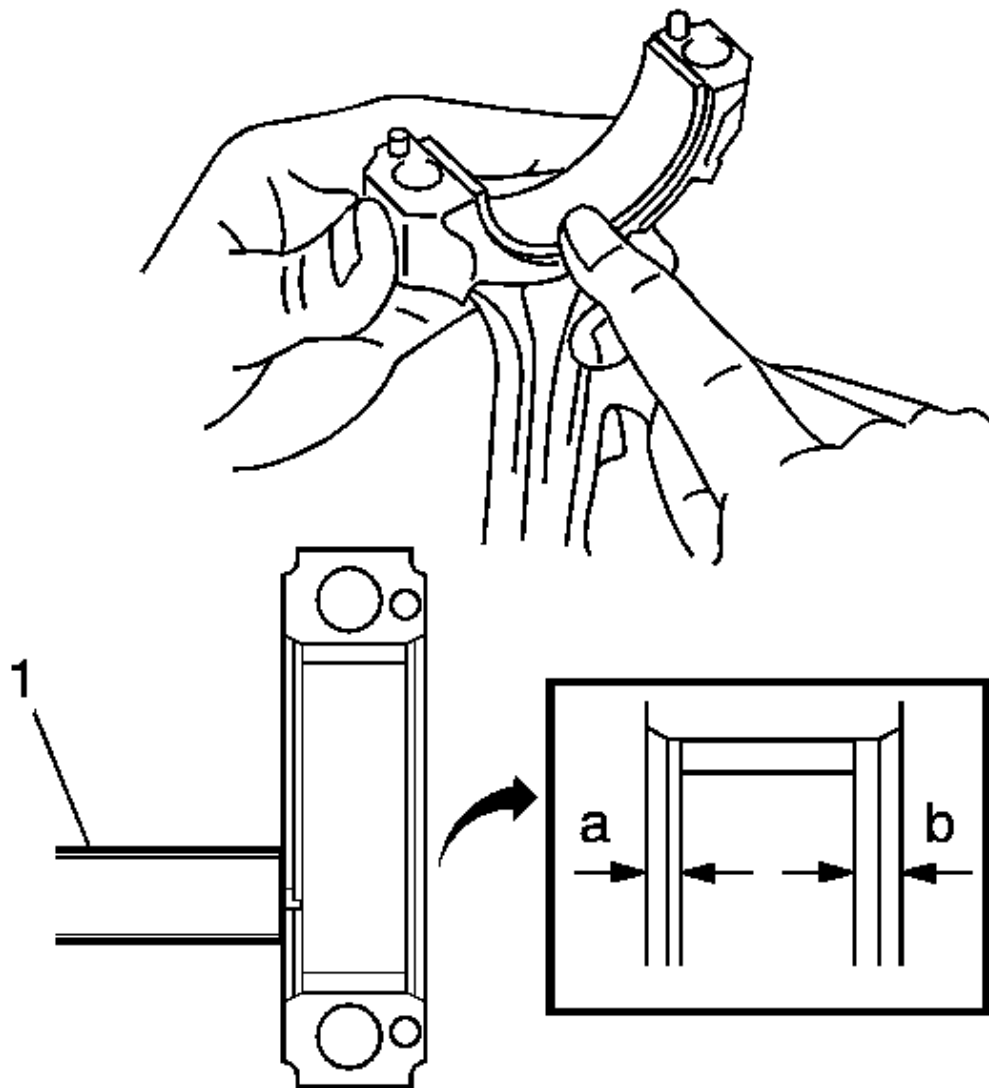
Measuring Distance Between Connecting Rod & Bearing Cap Edges & Connecting Rod Bearing Edge
